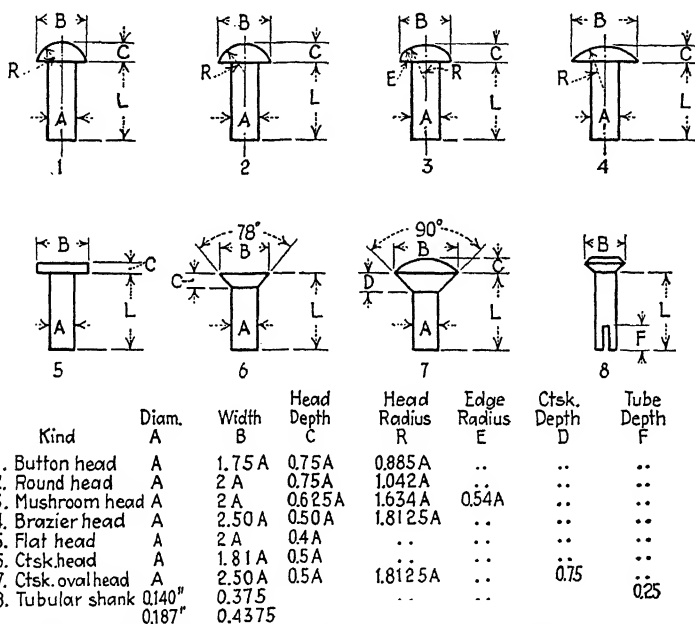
Common types of rivets that may be made from aluminum and aluminum alloys. (Courtesy of Aluminum Company of America; from *The Riveting of Aluminum*.)
